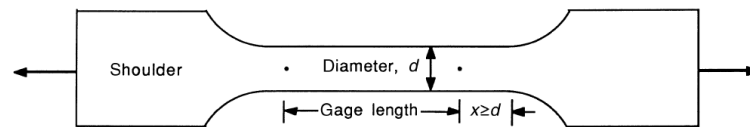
Typical tensile specimen, showing a reduced gage section and enlarged shoulders [135].
